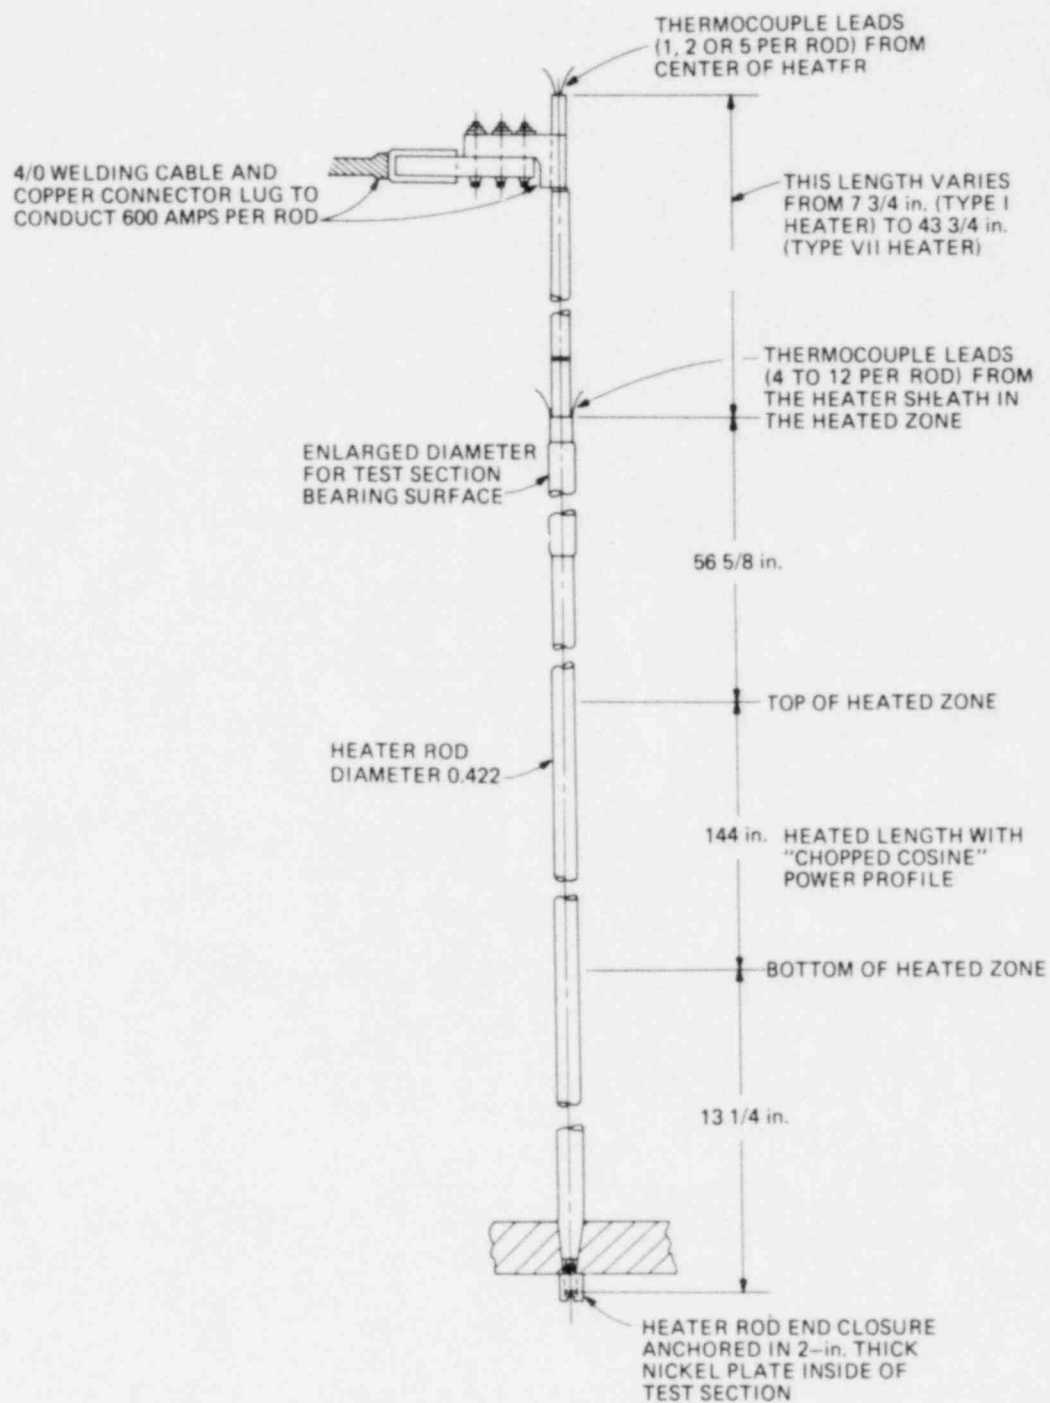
Indirect heater rod assembly (1 in. = 2.54 cm).
